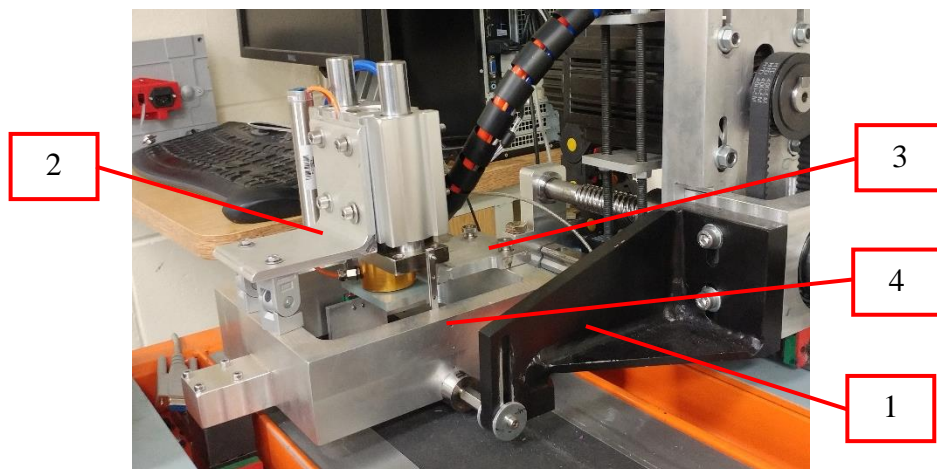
1. Carriage 2. fixture base 3. fixture door 4. inner fixture
